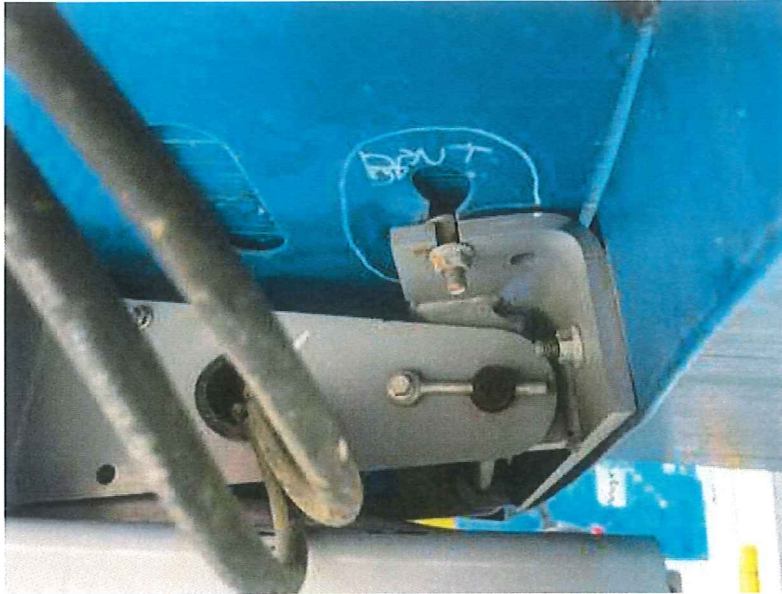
Bent and Torn Location, Upper Mounting Bracket to Platform.
